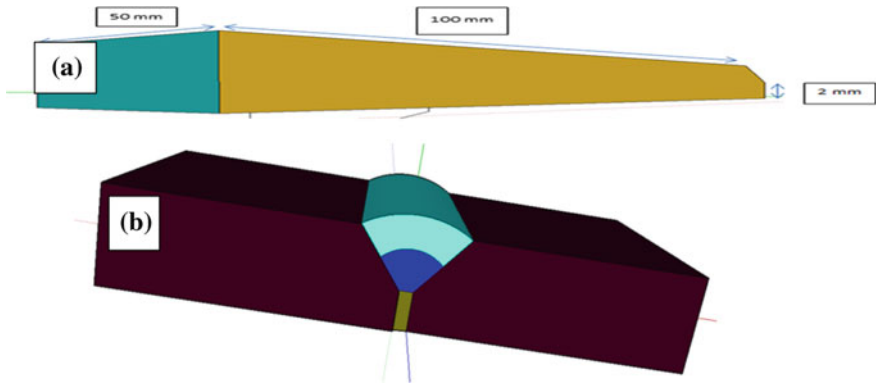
a Workpiece model with dimensions, b welded model with dimension
